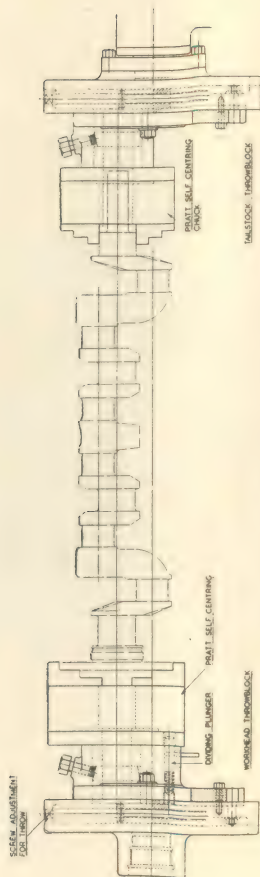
CRANK THROW ADJUSTMENT DEVICE
